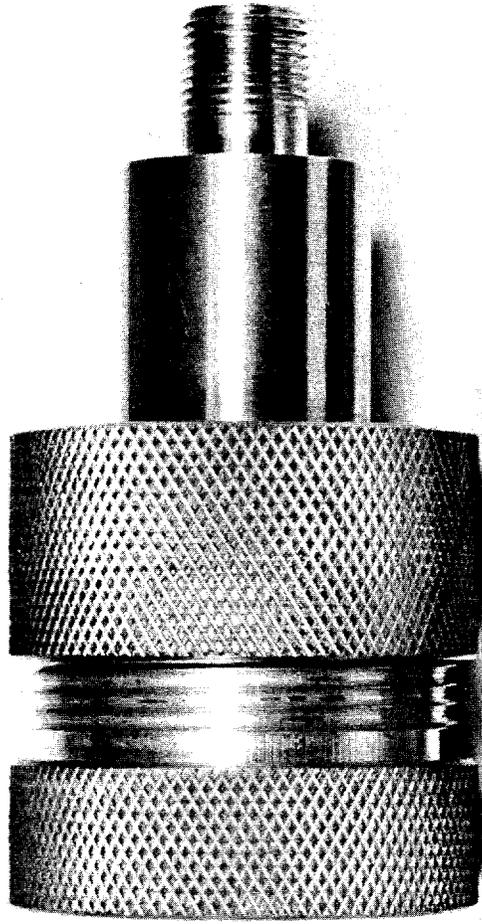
Single Unit Inventory Sampler -- Assembled.
